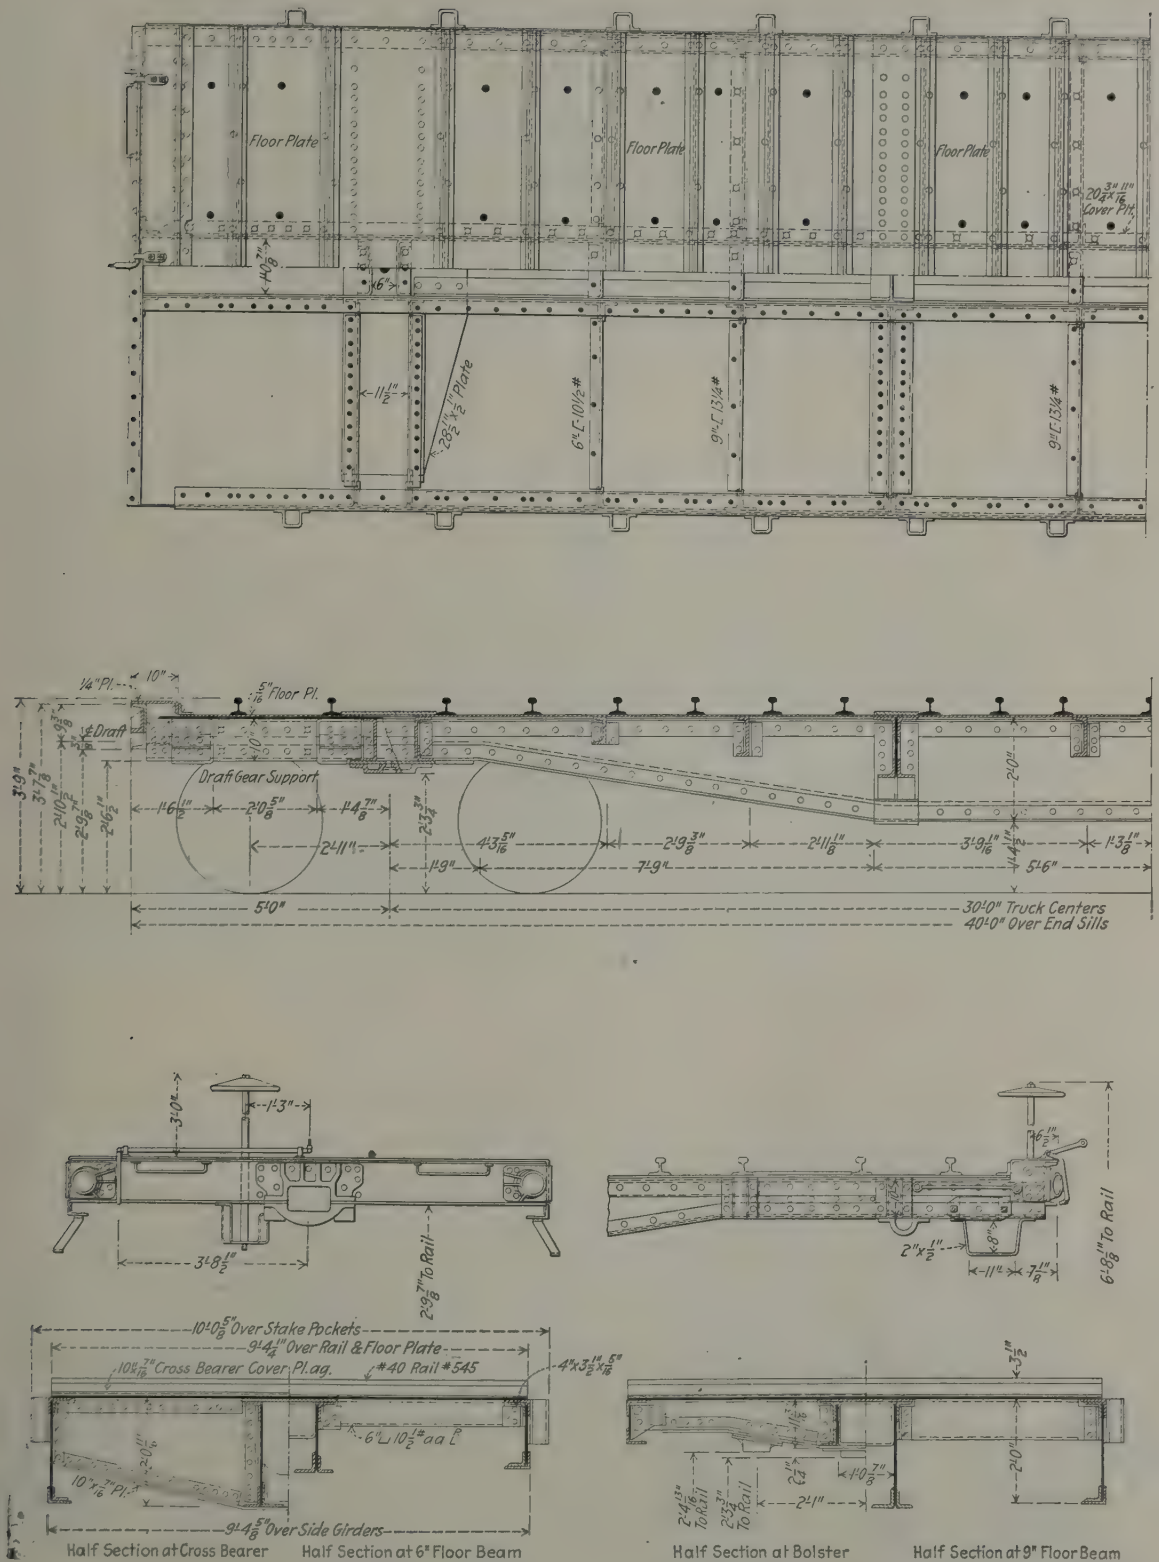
All-Steel 70-Ton Rail Floor Flat Car. Builder, Cambria Steel Company.
